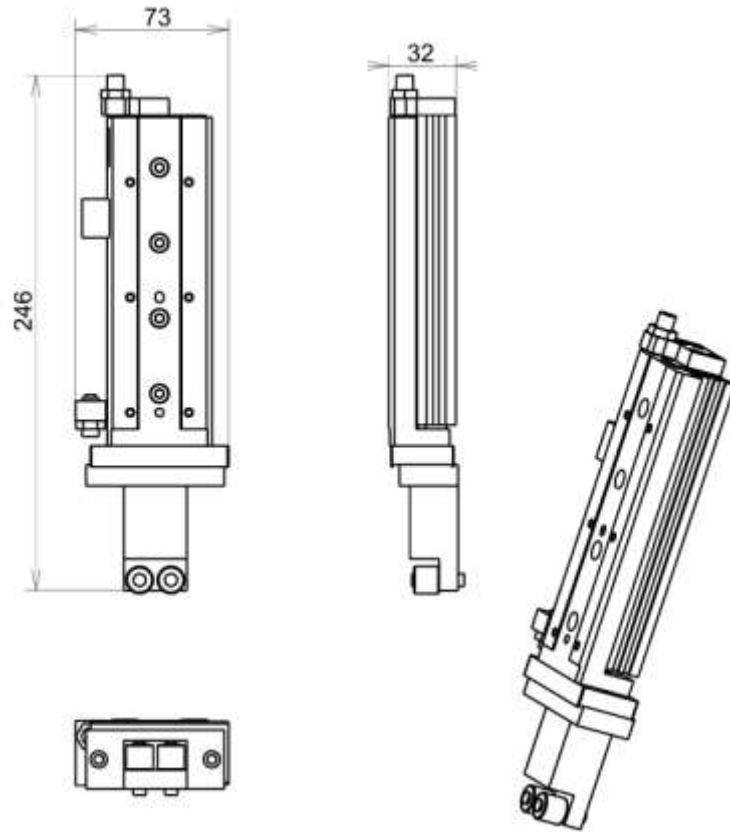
Technical parameters of tape pressing mechanism design 1.
